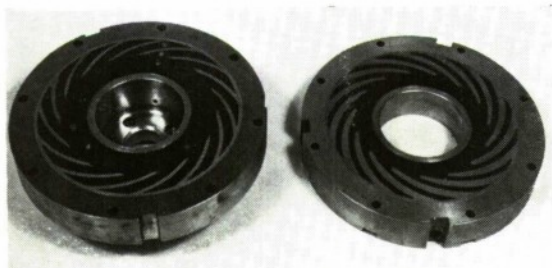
M.T.I. Hybrid and Self-Acting Thrust Bearing.
